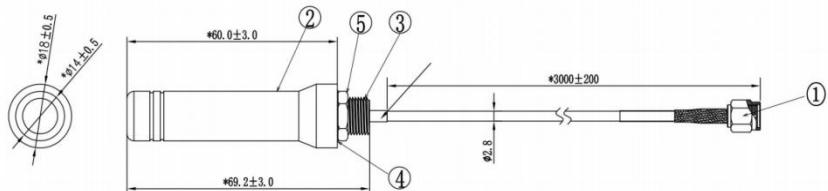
CE: dimensional drawing of 433MHz antenna 2
